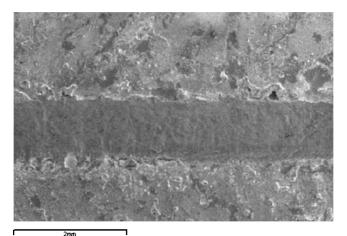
Typical interfacial shear fracture appearance of diode laser lap welds made on 1-mm-thick galvanneal coated DP600 steel with Al foil clamped between sheets. Welding speed was 0.7 m/min.
